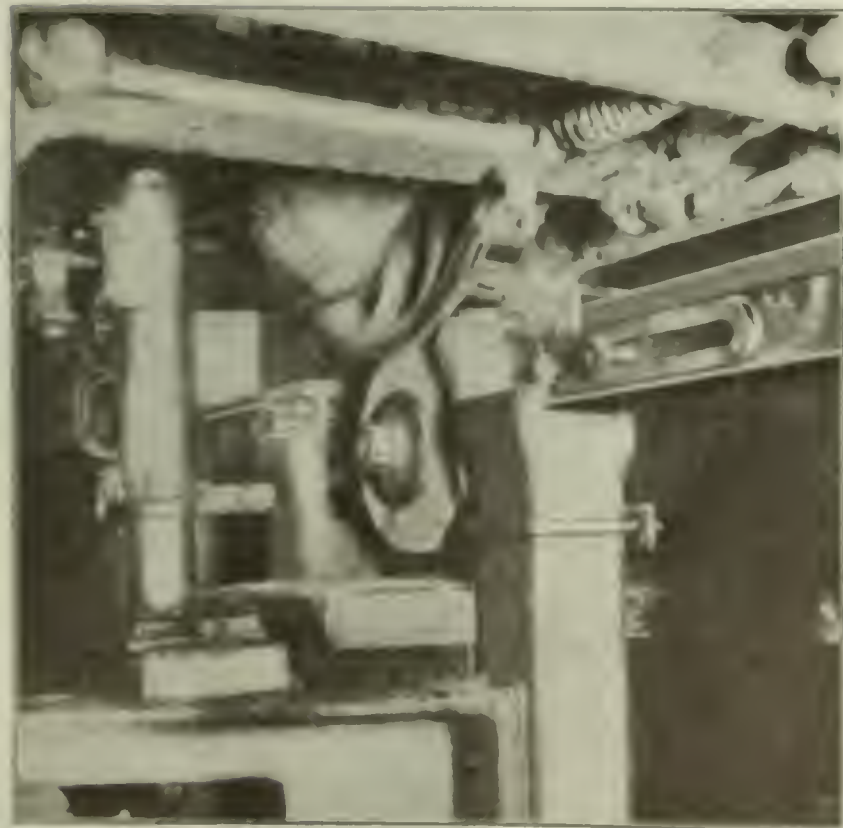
GRINDING WHEELS WHILE STILL IN PLACE
